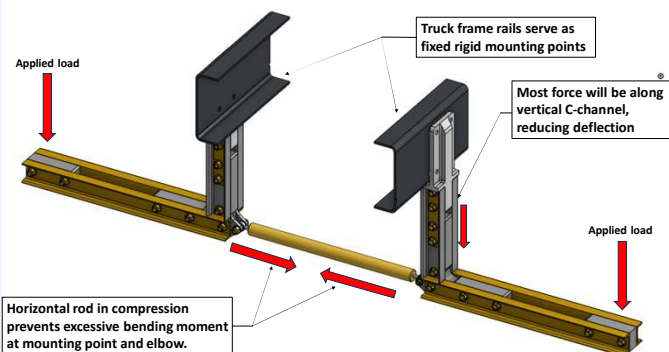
Frame rail and arm assembly with horizontal connecting rod
